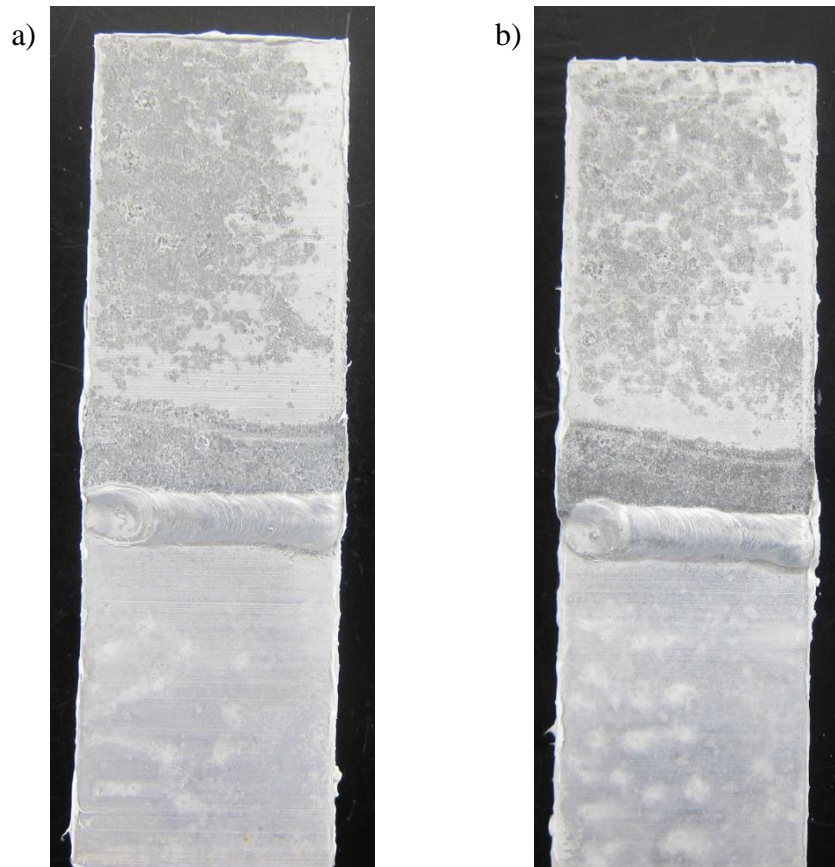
Duplicate samples of lap-joint welded configuration G1(ER5356/AA7003/≡) in the as-welded T6 condition.
